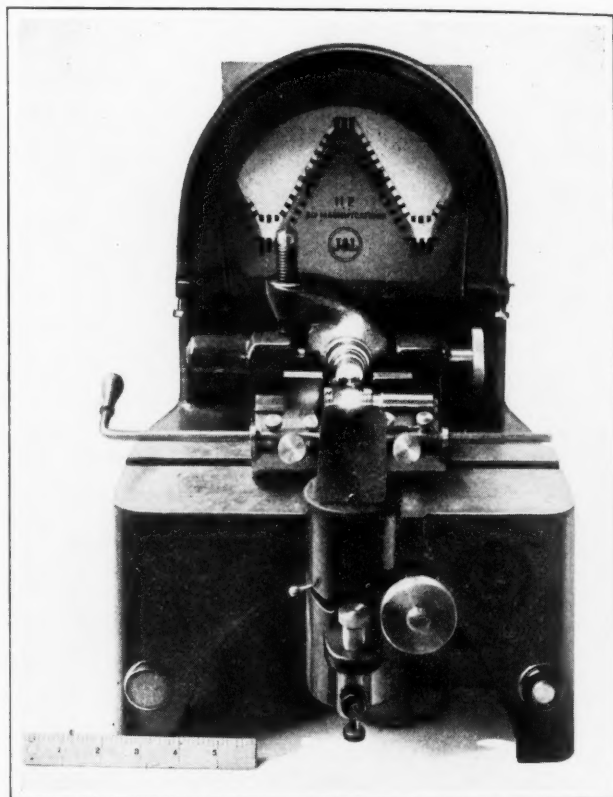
Machine arranged for testing the Profile of Gear Teeth
